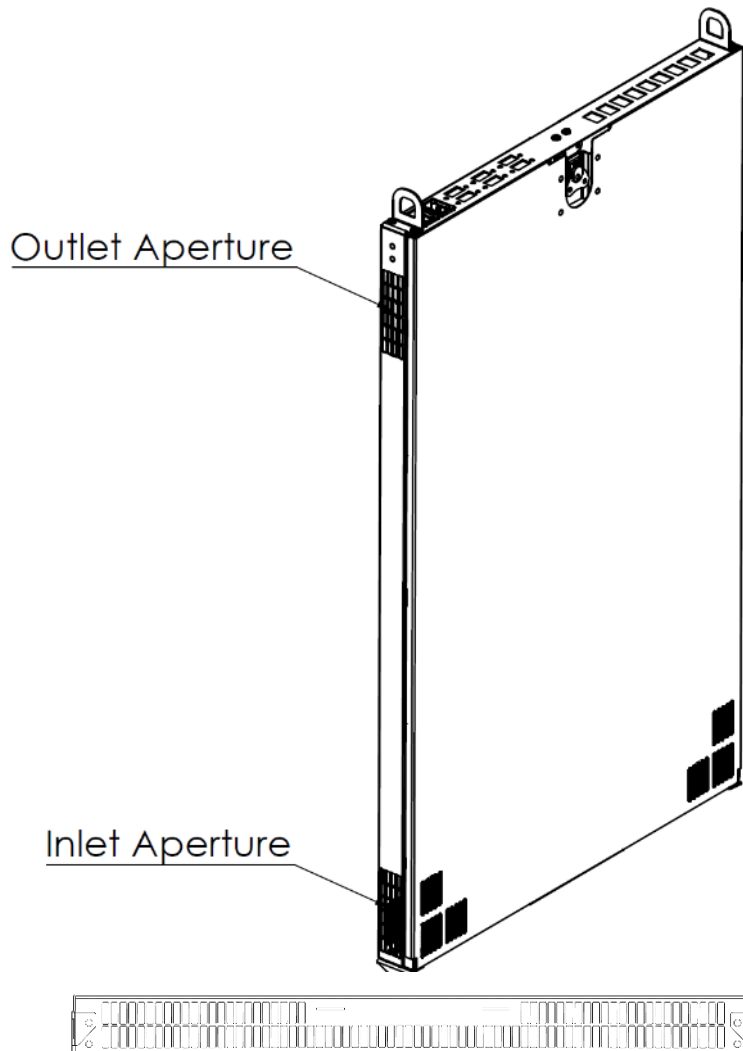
Inlet and outlet apertures, isometric and bottom view
